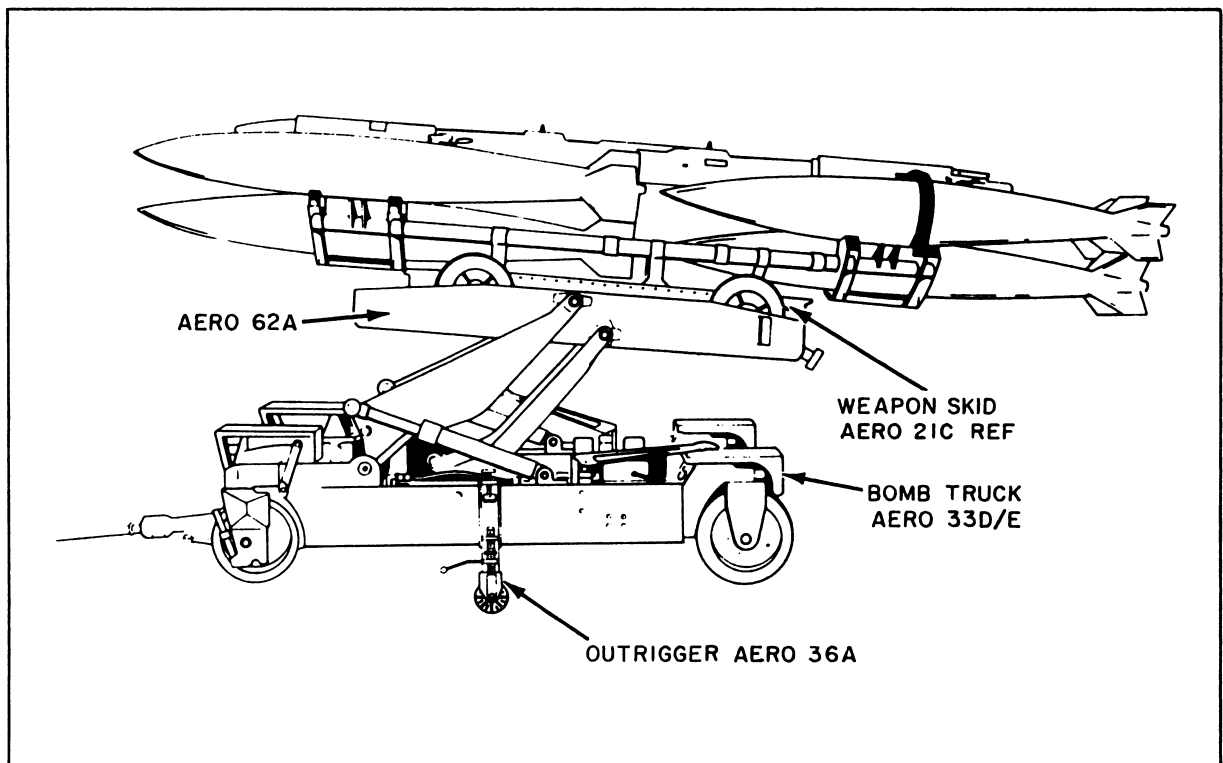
Aero 33D/E bomb truck with an Aero 62A tray adapter and an Aero 36A outrigger assembly installed.
